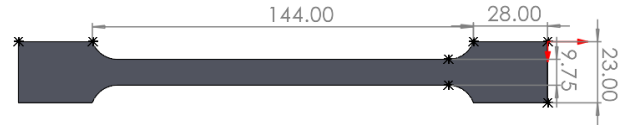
Dimensioned drawing of dogbone shape [mm]
